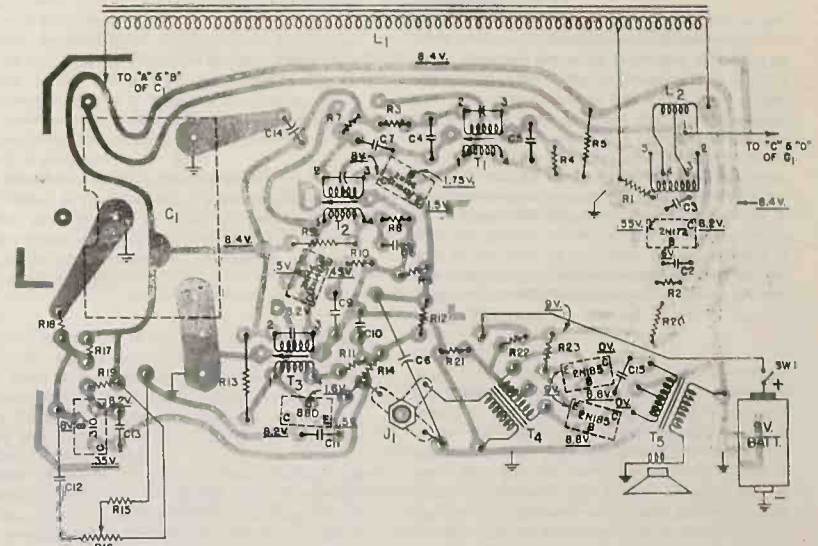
Bottom View of Printed Board Showing Top Components Symbolically
